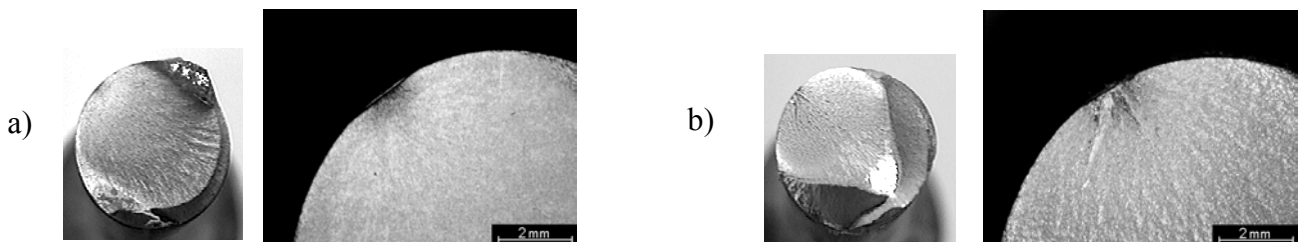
Macroscopic appearance of fracture surfaces. $\Delta\sigma = 698$ MPa. a) without torsion; b) with torsion
